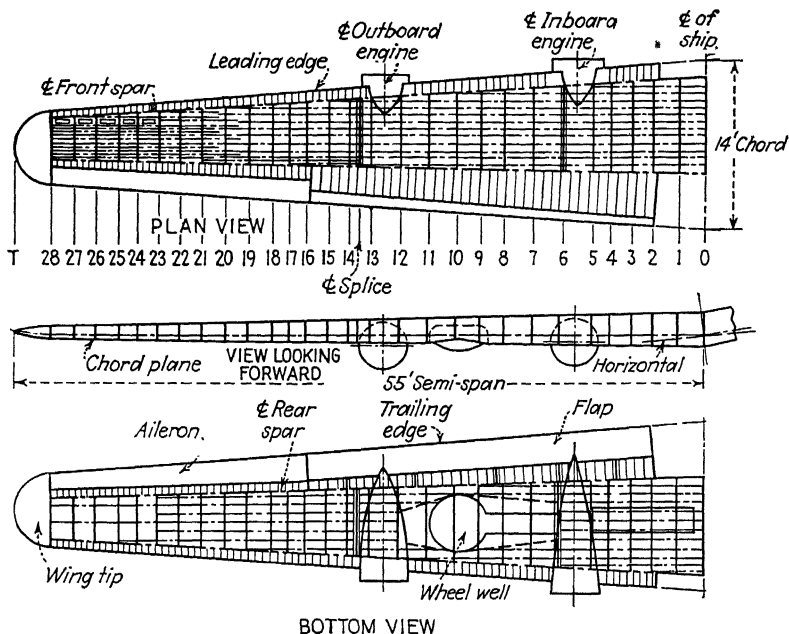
Structural layout of typical all-metal cantilever box-spar wing.
